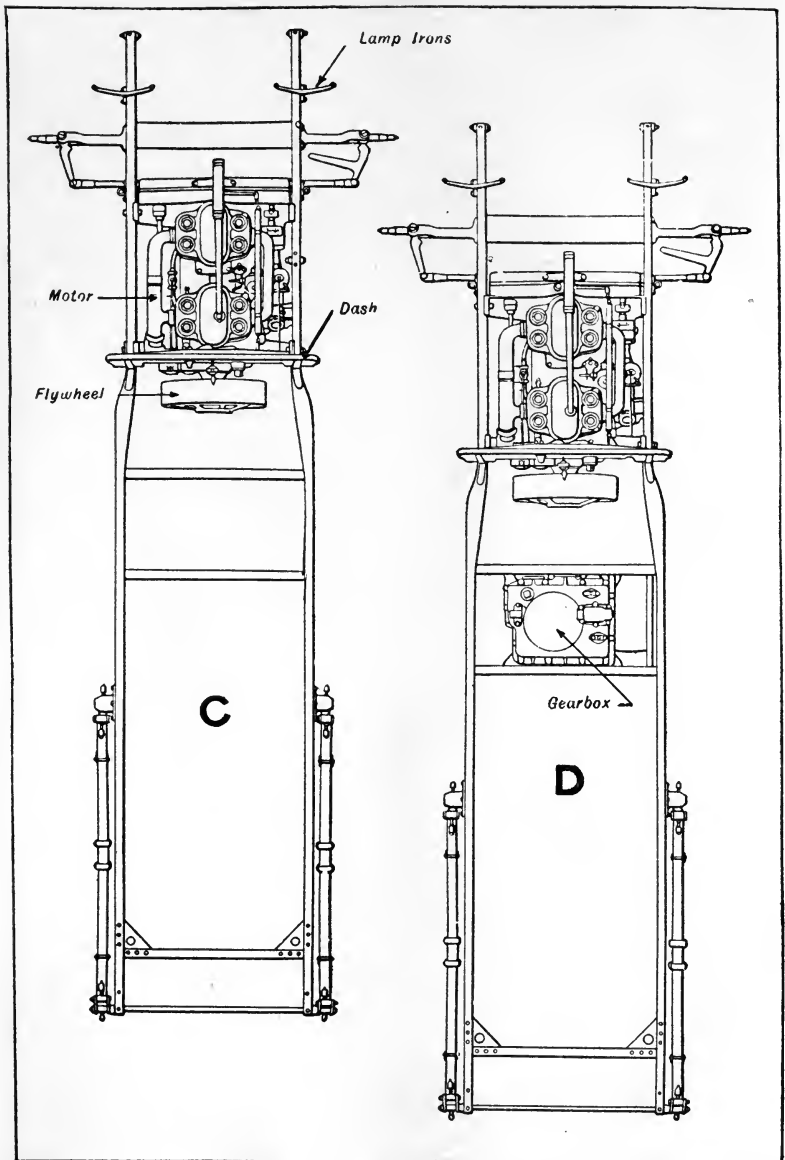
Views Detailing Further Steps in Assembling Typical Gasoline Car Chassis, Illustrating Location of Motor and Gear Box.
